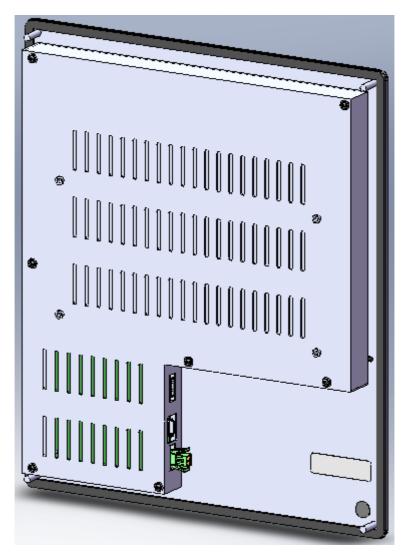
Rear view of VDP82.1 HMI operator panel
